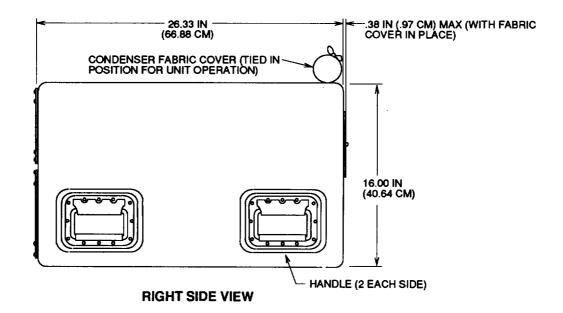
Installation Dimensions (sheet 2 of 3)
